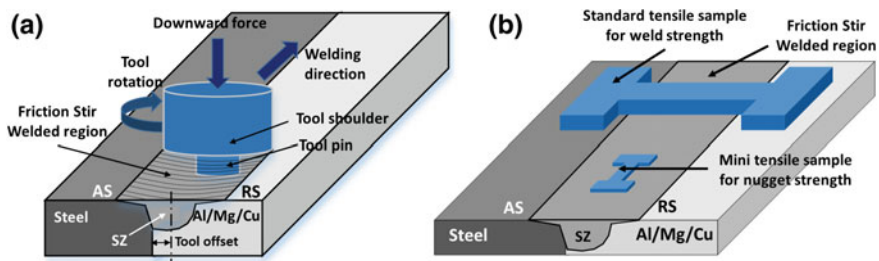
Schematic of a friction stir butt welding of Cu (Mg, Al) and steel sheets and b fabrication of standard and mini tensile samples
